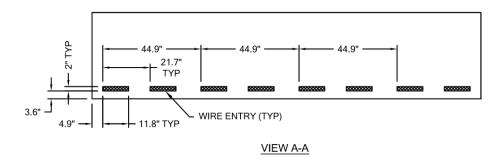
UPS Cabinet (500 KVA) Access and Mounting
